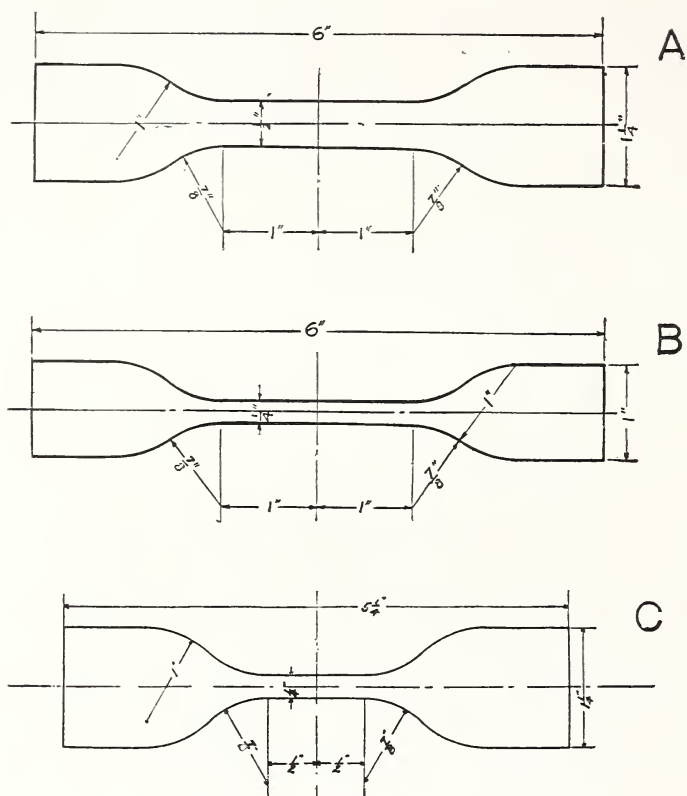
One-fourth and one-half inch test pieces with enlarged ends
